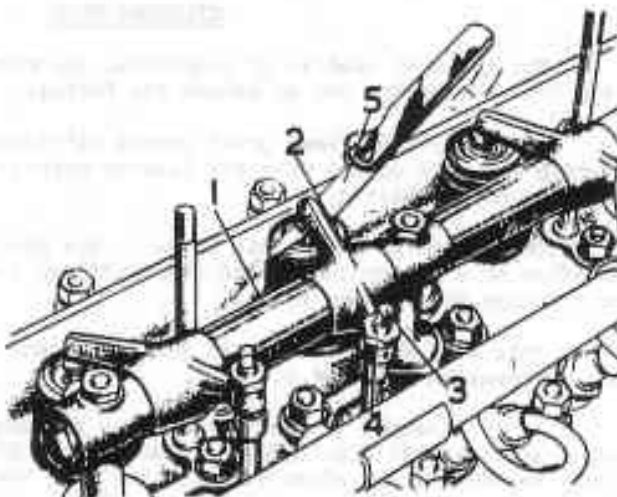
ADJUSTING INLET VALVE ROCKER CLEARANCE.
